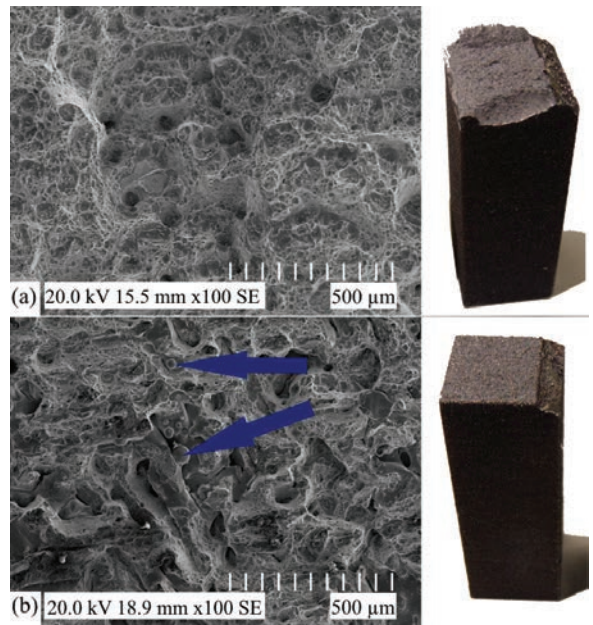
SEM image of fracture surface of Charpy specimens a) uniform 20 μm layer thickness and b) containing 160 μm layer
